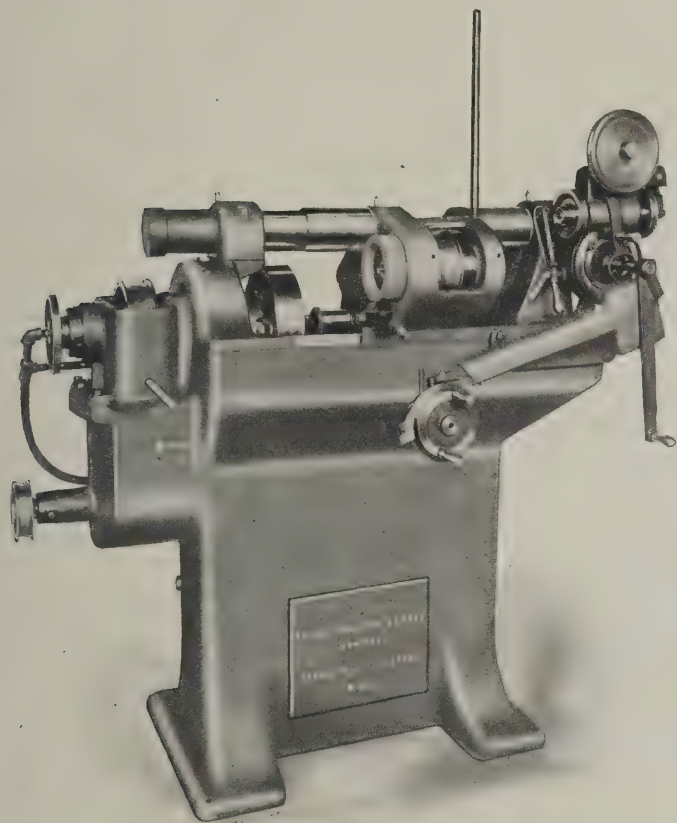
Two-spindle Face- and Hole-grinder built by Bryant Chucking Grinder Co.
